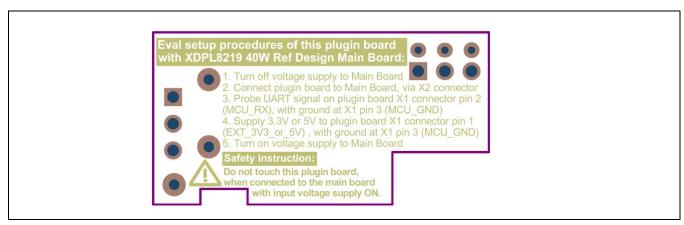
PCB bottom layout of isolated UART reporting evaluation plug-in board
